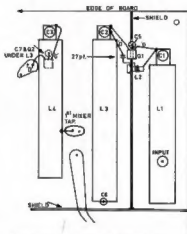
UNDER SIDE OF PRINTED CIRCUIT BOARD SHOWING CONSTRUCTION OF STRIP LINES & SHIELDS
